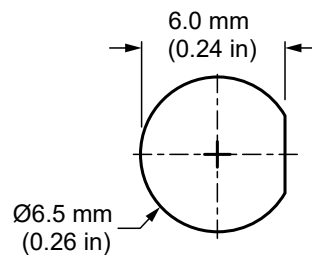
Recommended Mounting Hole Dimensions for the CSB-RGFB-102-UFFR Cable Assembly
